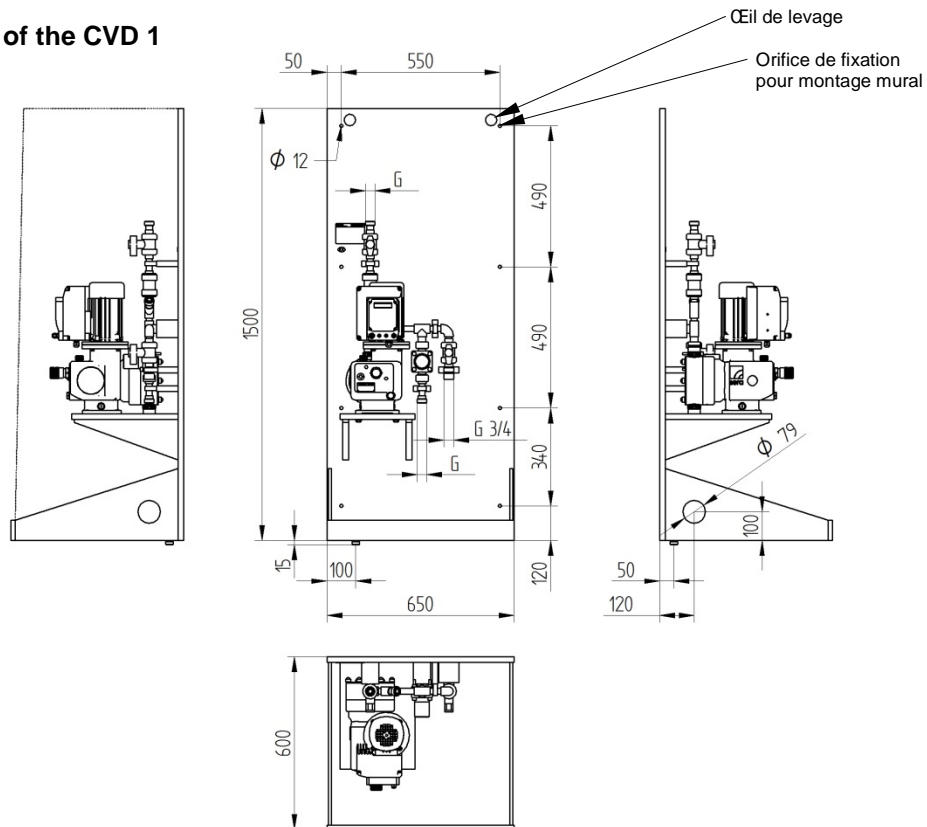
Dimensions of the CVD1 (wall mounting)
